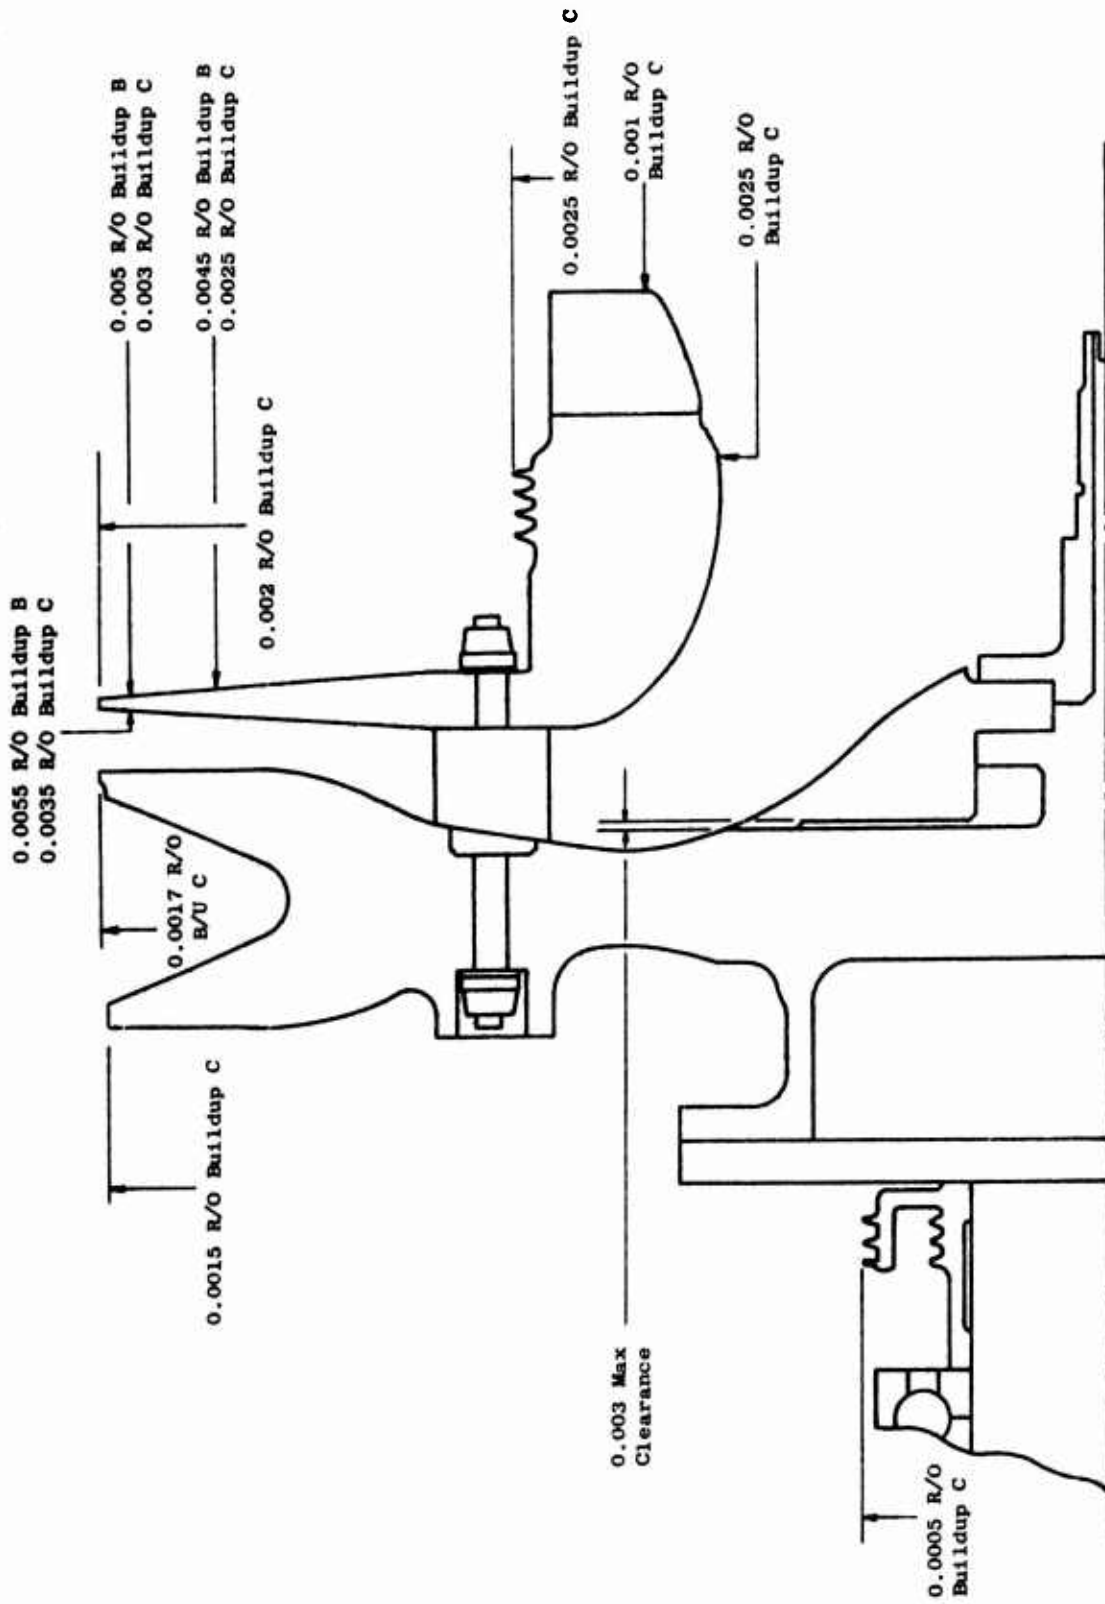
Values of Rotor Runout (R/O) Measured After Buildup B Testing and After Assembly for Buildup C Testing.
